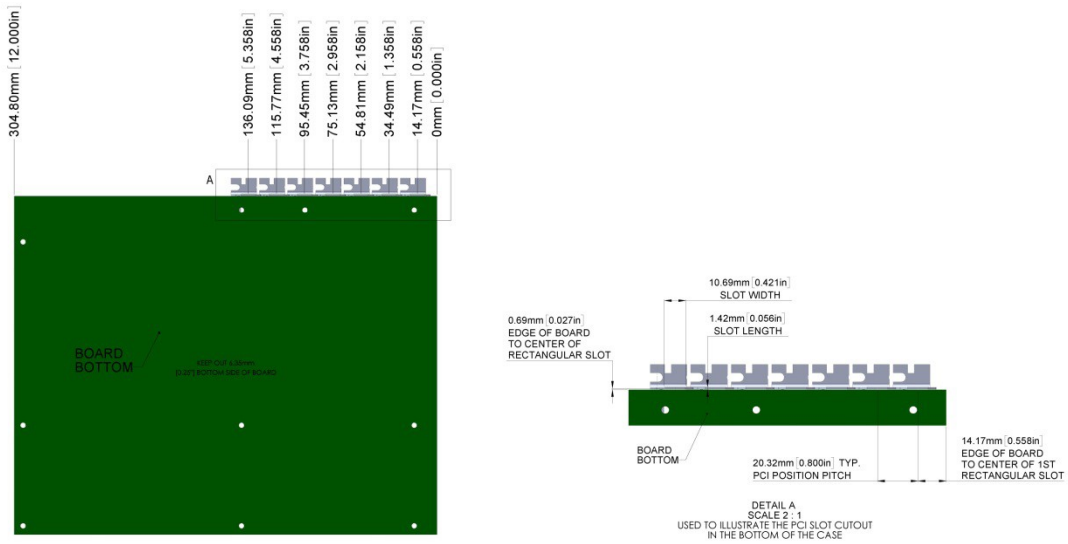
ATX board bottom view, with dimensions for rectangular slot for PCI tab.
